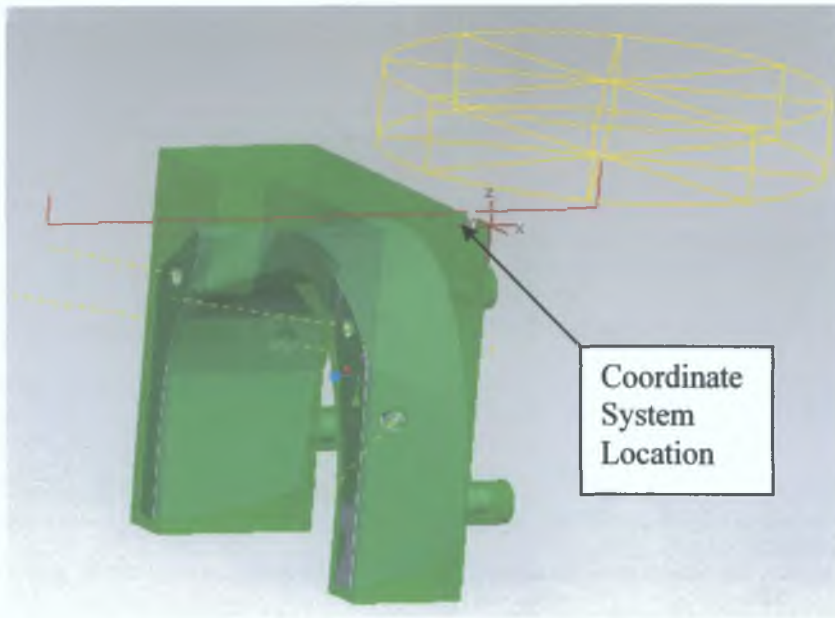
Face Mill Sequence 3 ProEngineer Tool Path.
